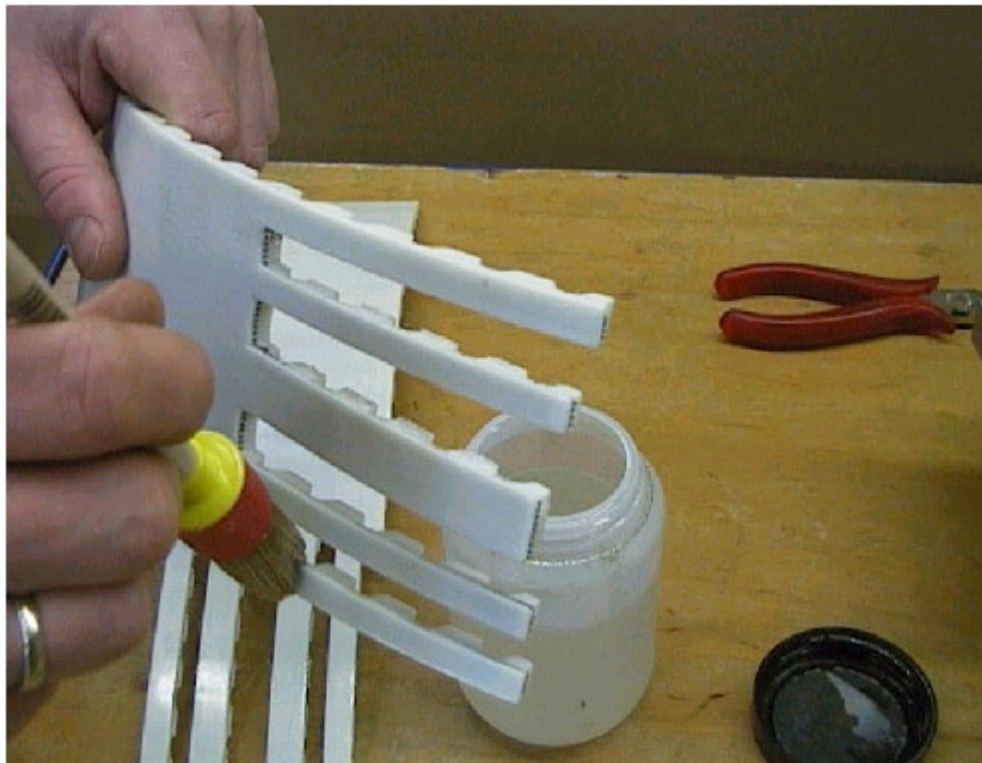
Wet the areas to be welded with the bonding agent
